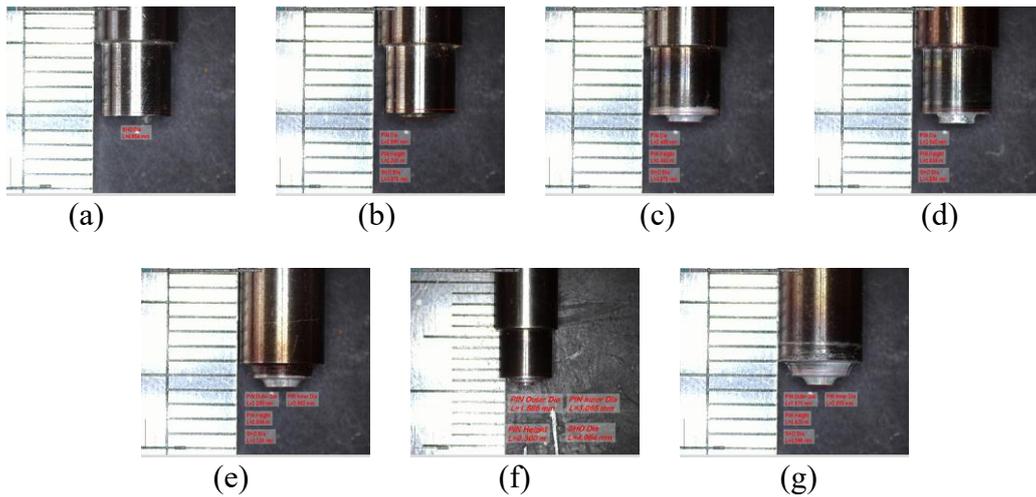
Tools Used in the mFSSW Process (a) Tool 1, (b) Tool 2, (c) Tool 3, (d) Tool 4, (e) Tool 5, (f) Tool 6, (g) Tool 7
